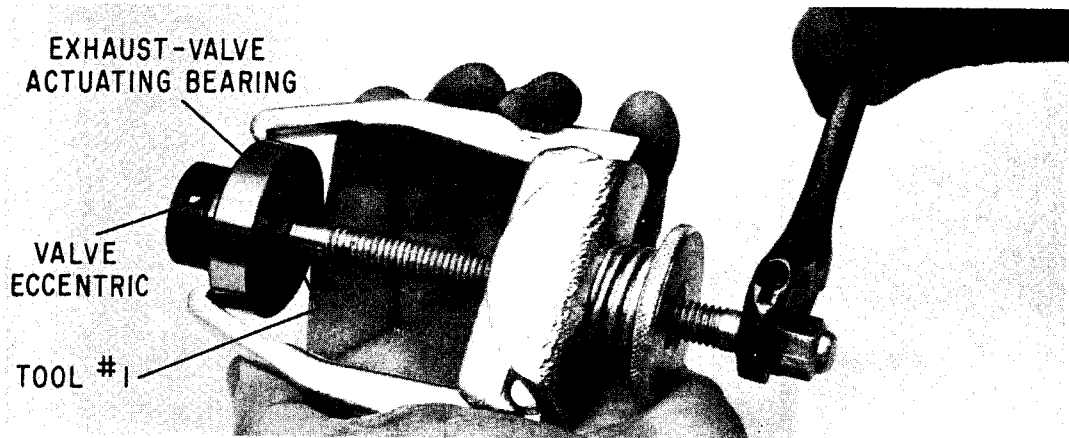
REMOVING THE EXHAUST-VALVE ACTUATING BEARING
